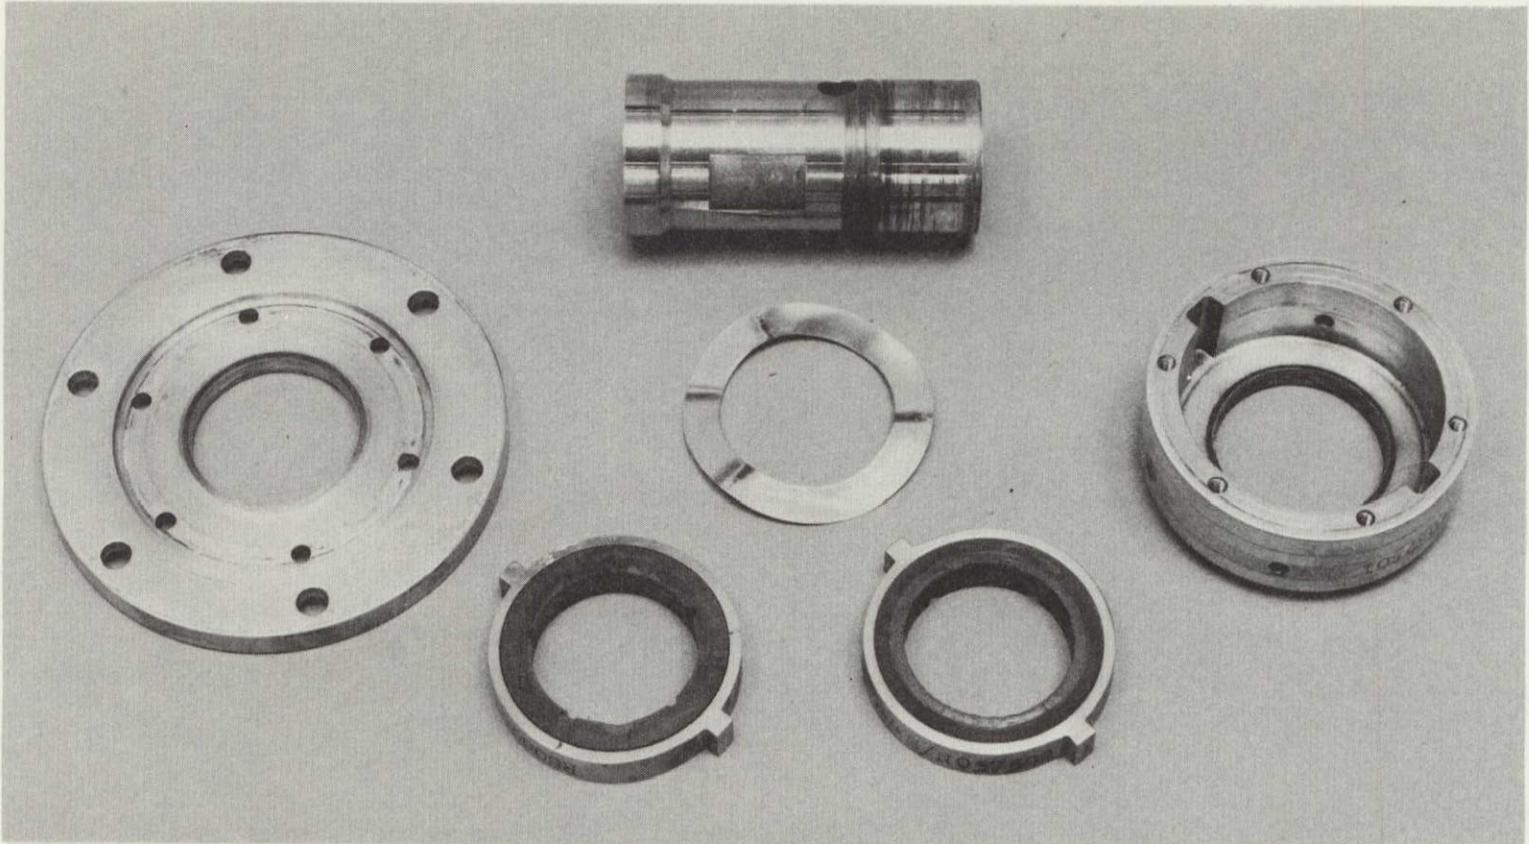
Helium Seal Assembly Following Bearing Failure
